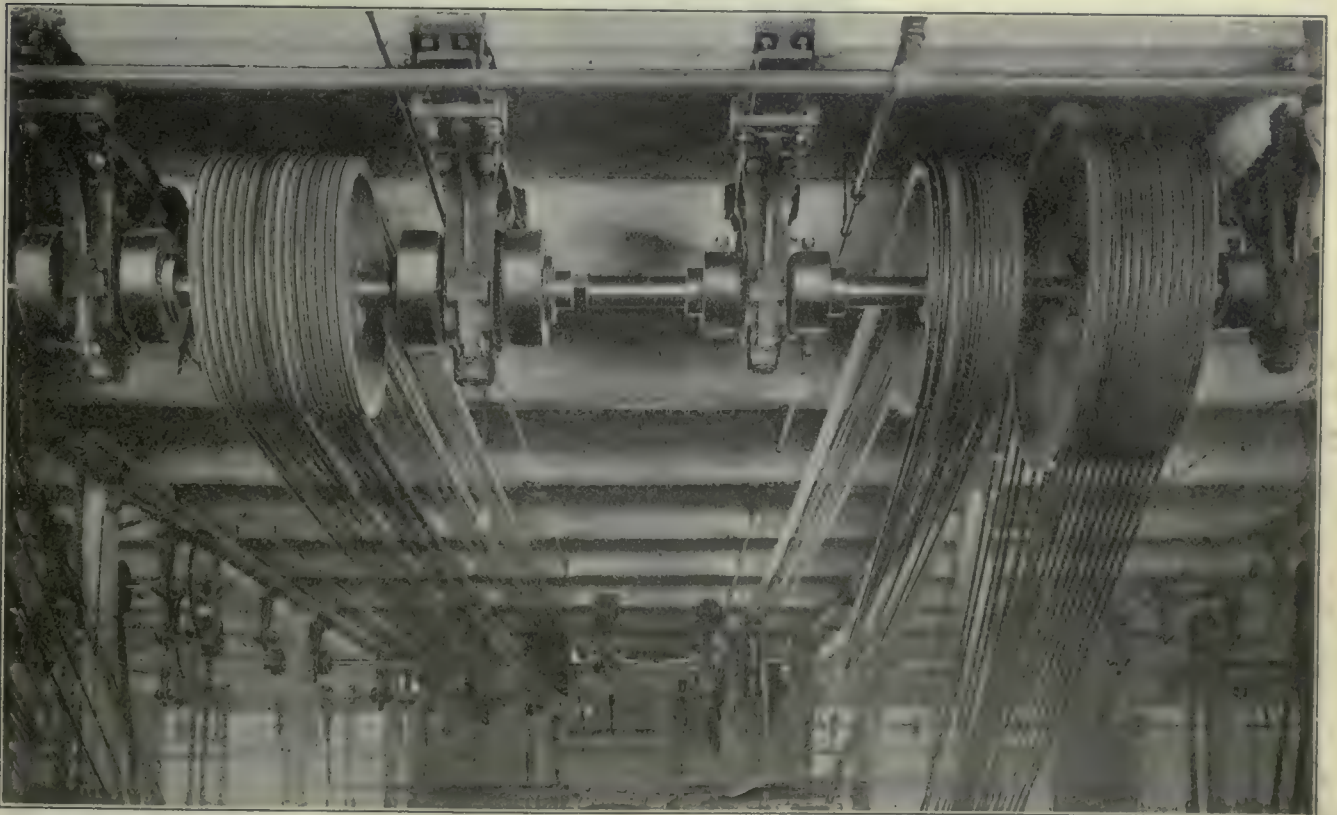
MAIN DRIVE SHAFTING RUNNING ON BALL-BEARINGS AND TRANSMITTING OVER 300 HORSE-POWER IN A COTTON MILL.
